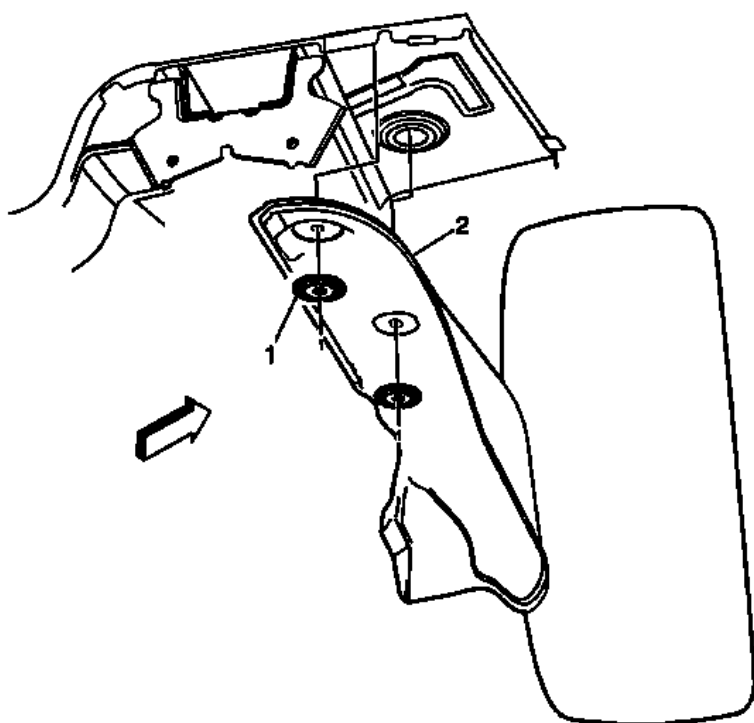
Exhaust Rear Muffler Heat Shield (Right Rear Corner)
